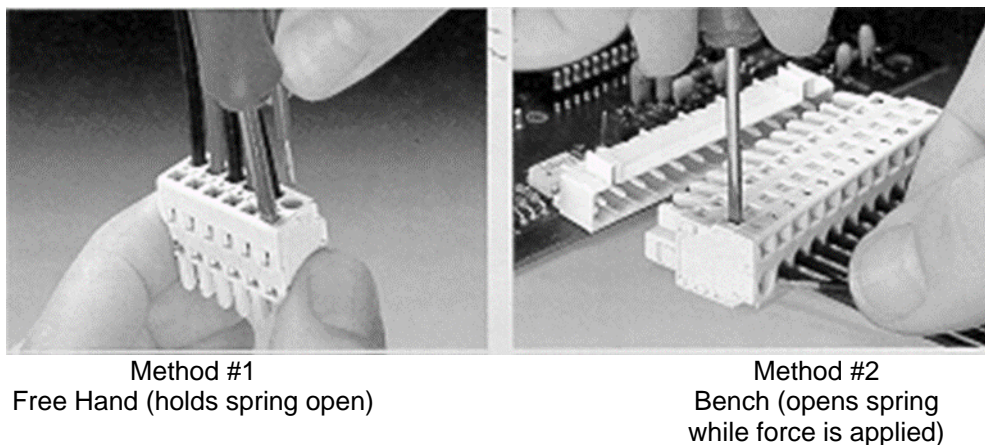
Wiring of Pluggable Spring Clamp Terminals
